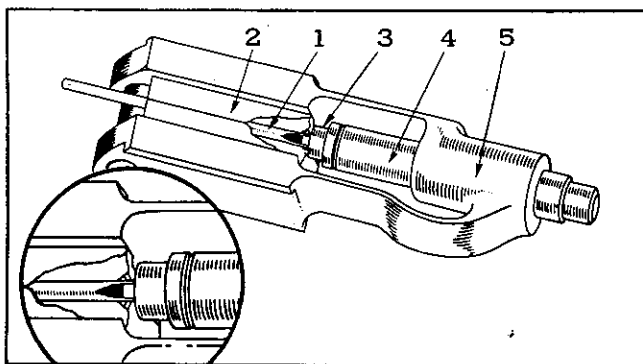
Placing Tubing in Die Block Preparatory to Flaring.
